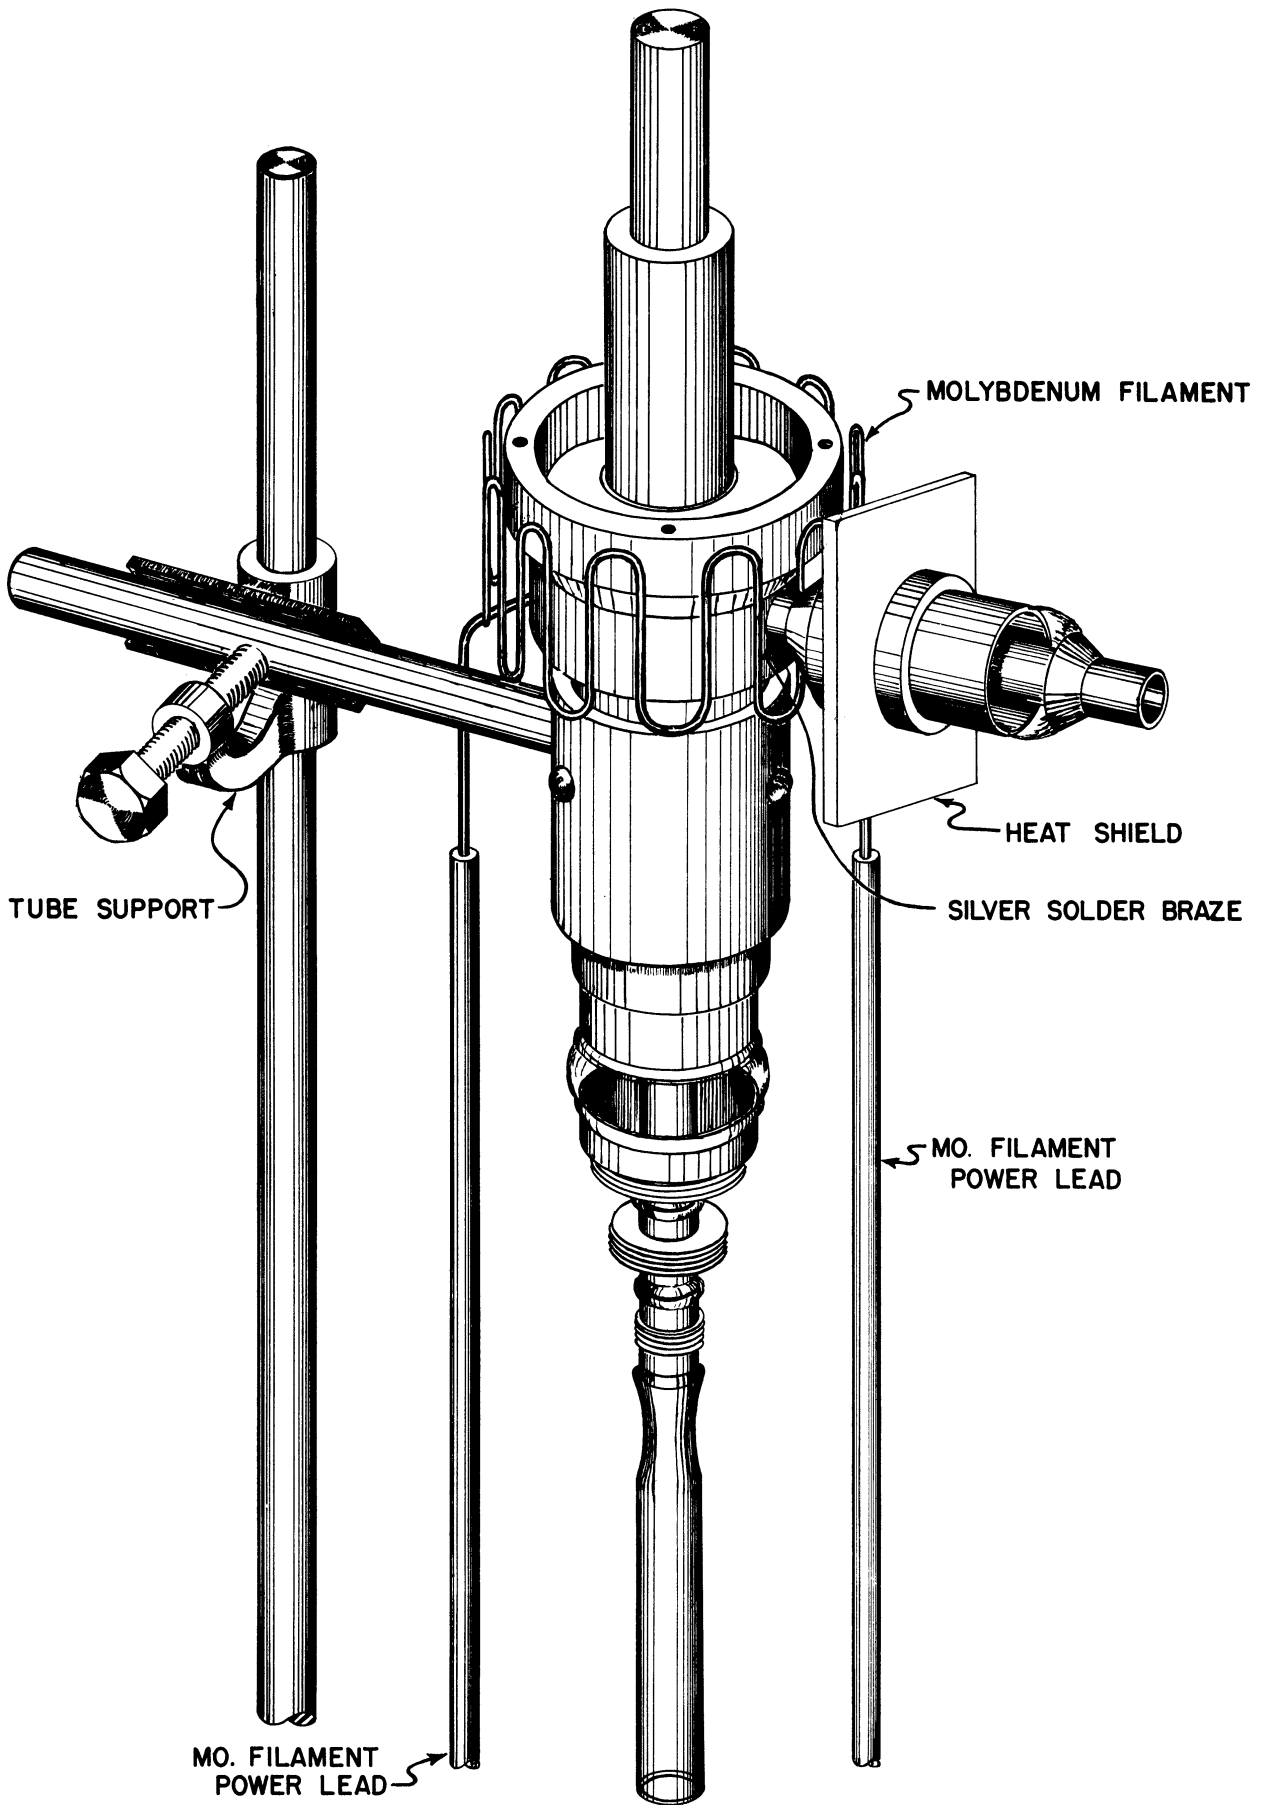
4<sup>th</sup> BRAZE-OUTPUT ASSEMBLY TO TUBE BODY
